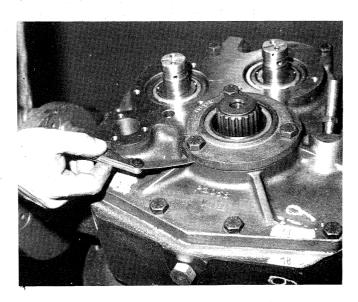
Measuring shim space between output bearing retainer and rear cover.
